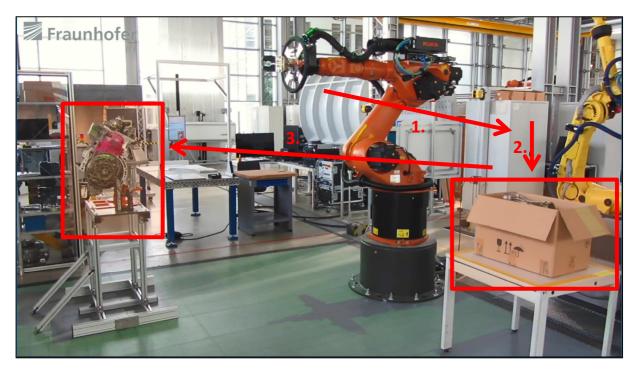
Single steps of the assembly process: Mounting a turbo-charger to motor-block.
